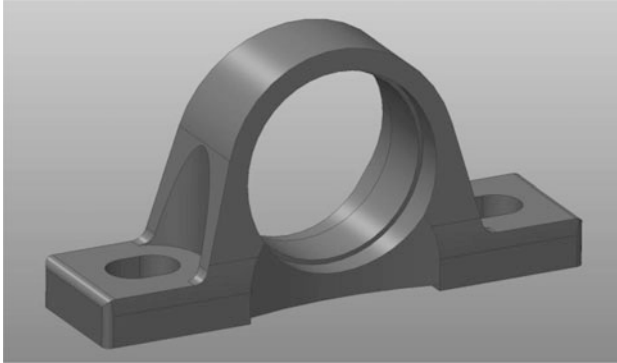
Standard model of bearing housing used in bearing units by bearing manufacturers
